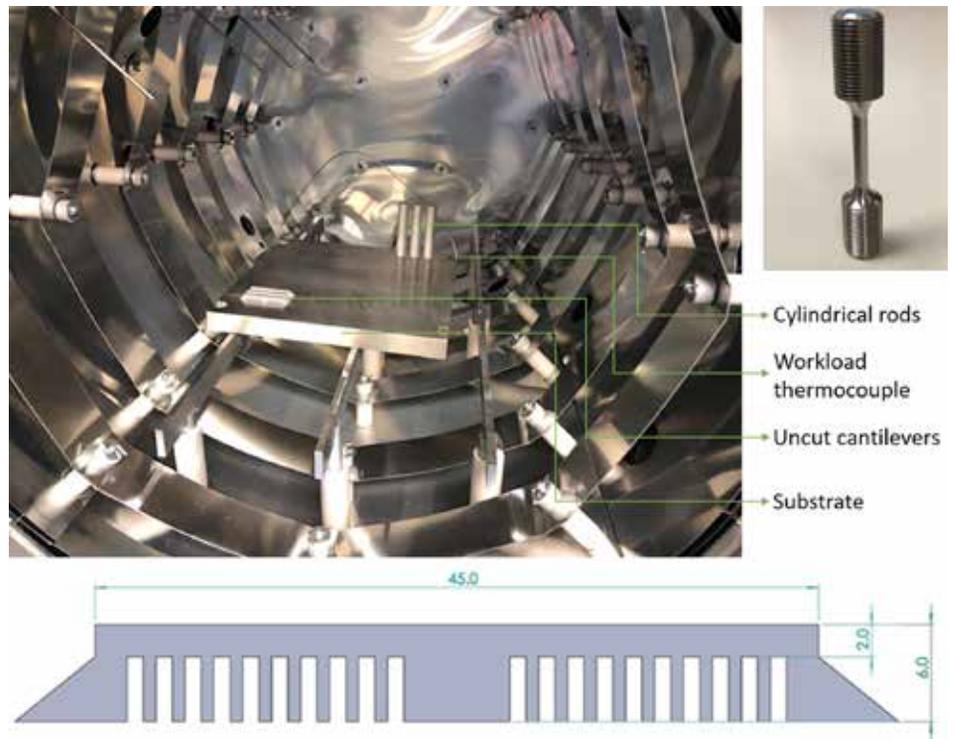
Ti6Al4V substrate with unmachined tensile rods and cantilevers inside the vacuum chamber. A typical machined tensile specimen is shown at the top right, and the cantilever specimen dimensions are at the bottom.
